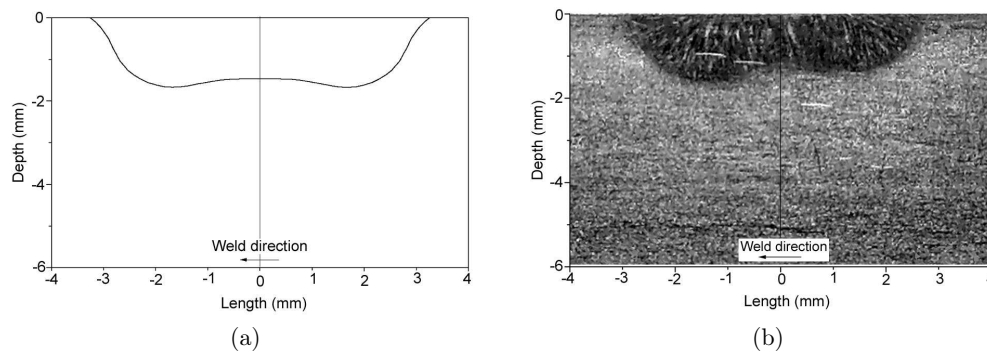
Weld pool depth for 90° torch (a) Numerical (b) Experimental
